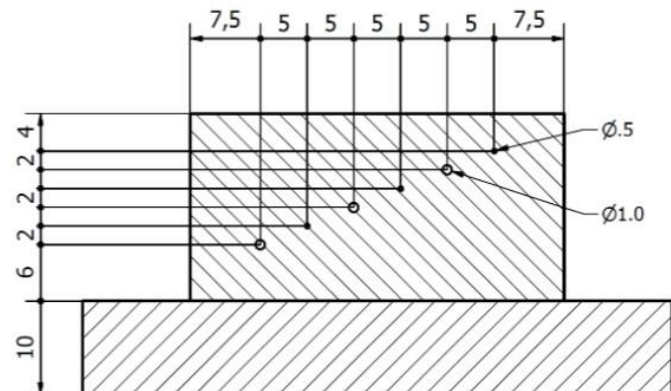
AM SAMPLE SCHEMATIC ILLUSTRATING MOCK SIDE DRILLED HOLES OF VARYING DIAMETERS AND INCREASING DEPTH, MANUFACTURED USING SELECTIVE LASER MELTING.
